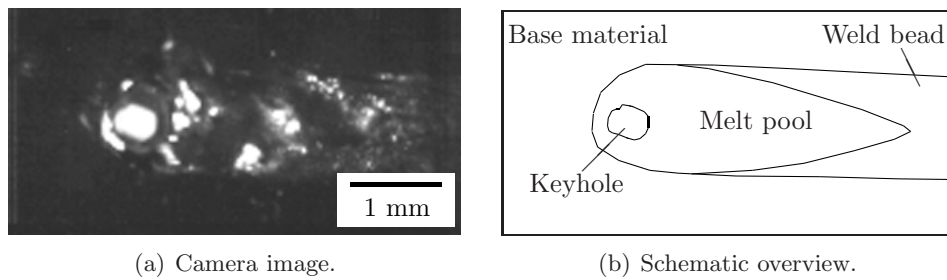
Camera image of the laser welding process, with a circular shaped keyhole.
